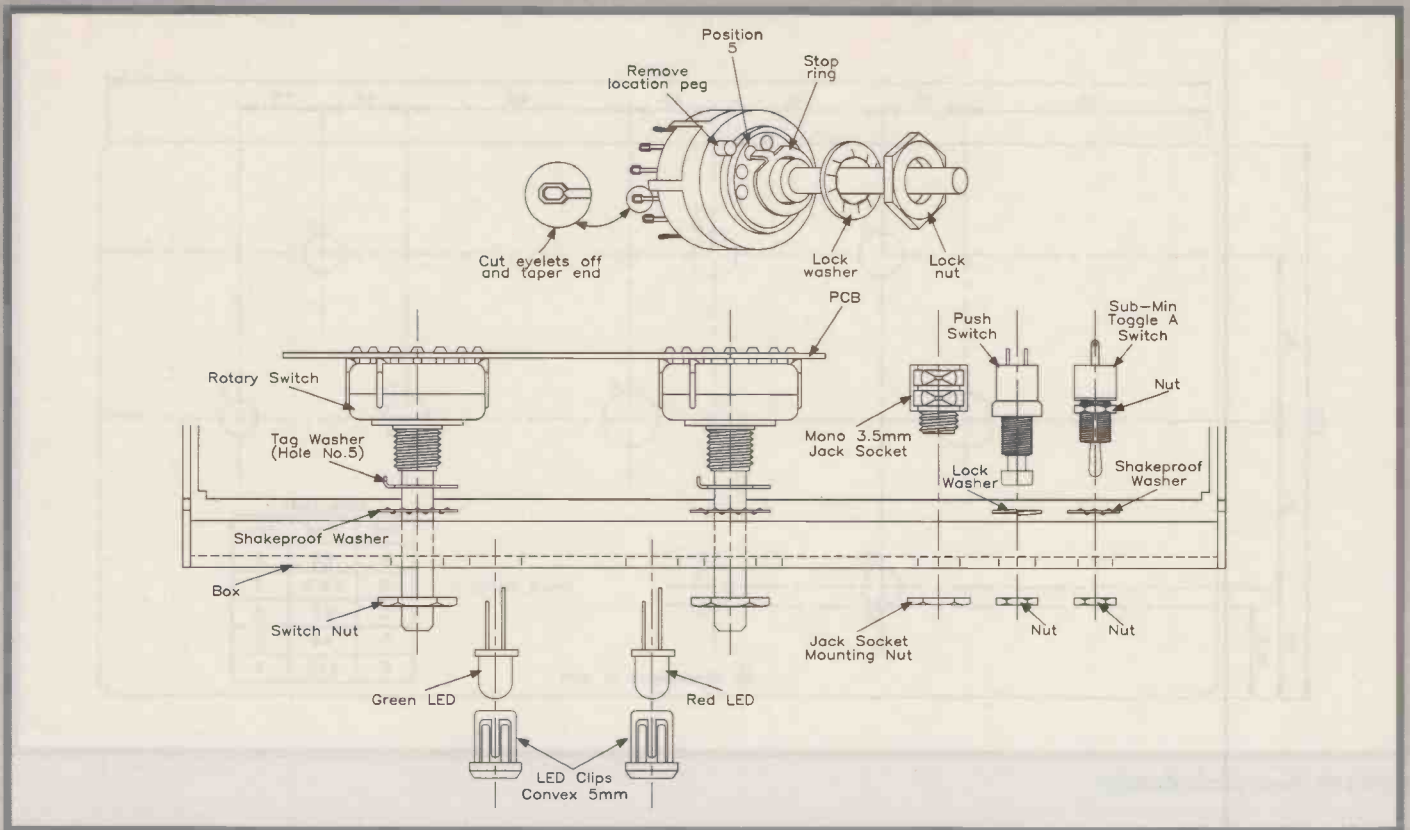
Front PCB switch, LED mounting and front panel assembly.
